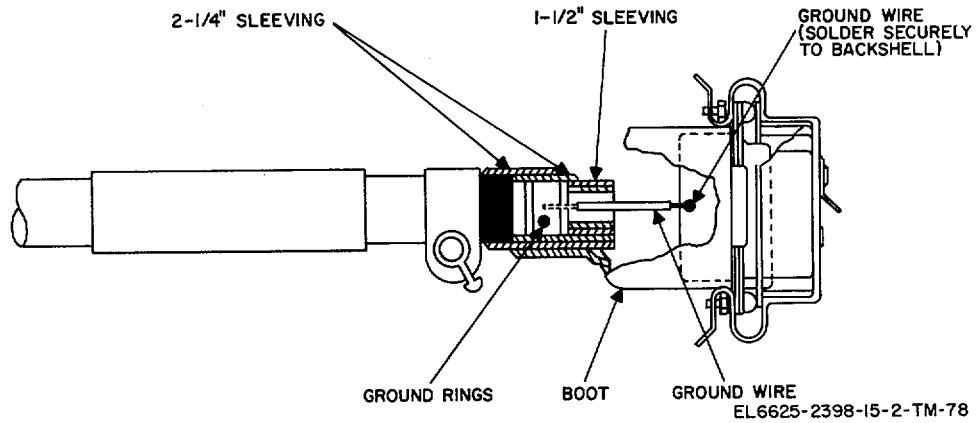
Connector assembly for cable 2A2W 1/ 2A2 W2 / 2A2W3.
